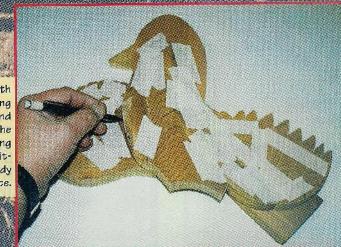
Smooth out any irregularities left from cutting out the feathers. The wing is sanded with a 1/4" sanding drum, turn to page 16 for details on how to make one yourselfl
